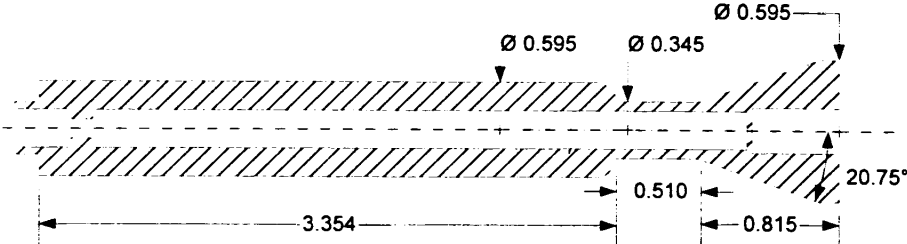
Modified center conductor with reduced diameter within the section embedded in the lens. (Dimensions are inches.)
